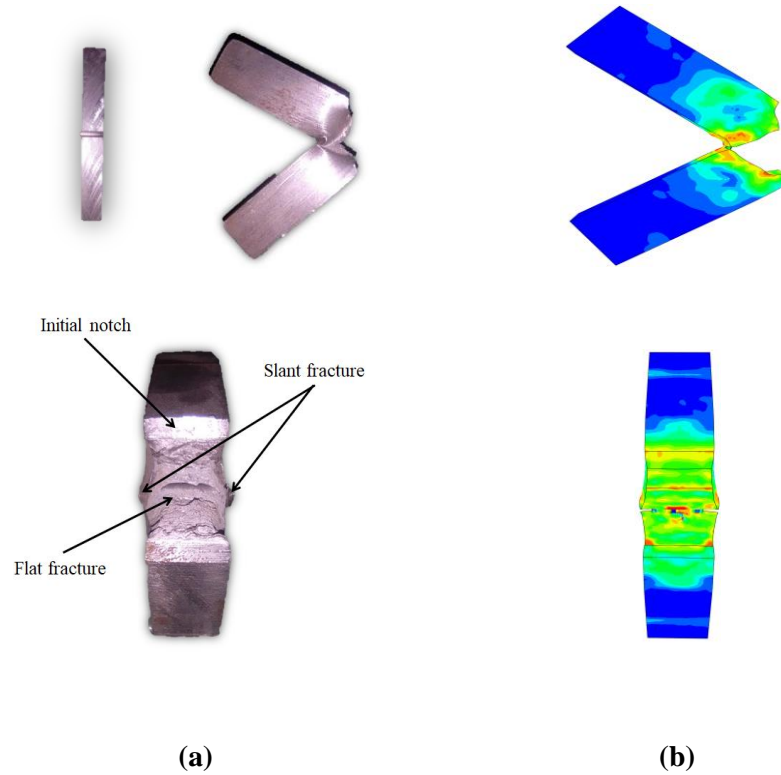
33 The fractured impact specimen: tested specimen (a); Simulated specimen (b).
